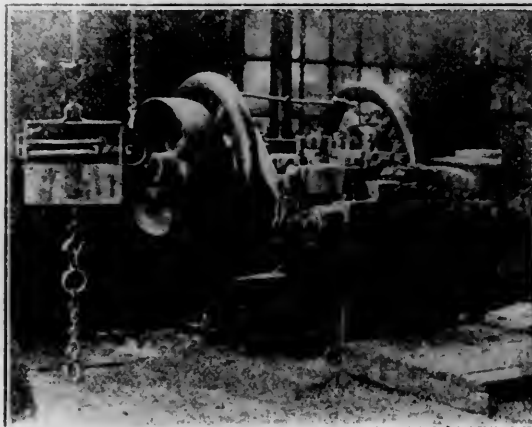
FORGING MACHINE AND SCALE ON THE HOIST FOR WEIGHING BOLTS.
